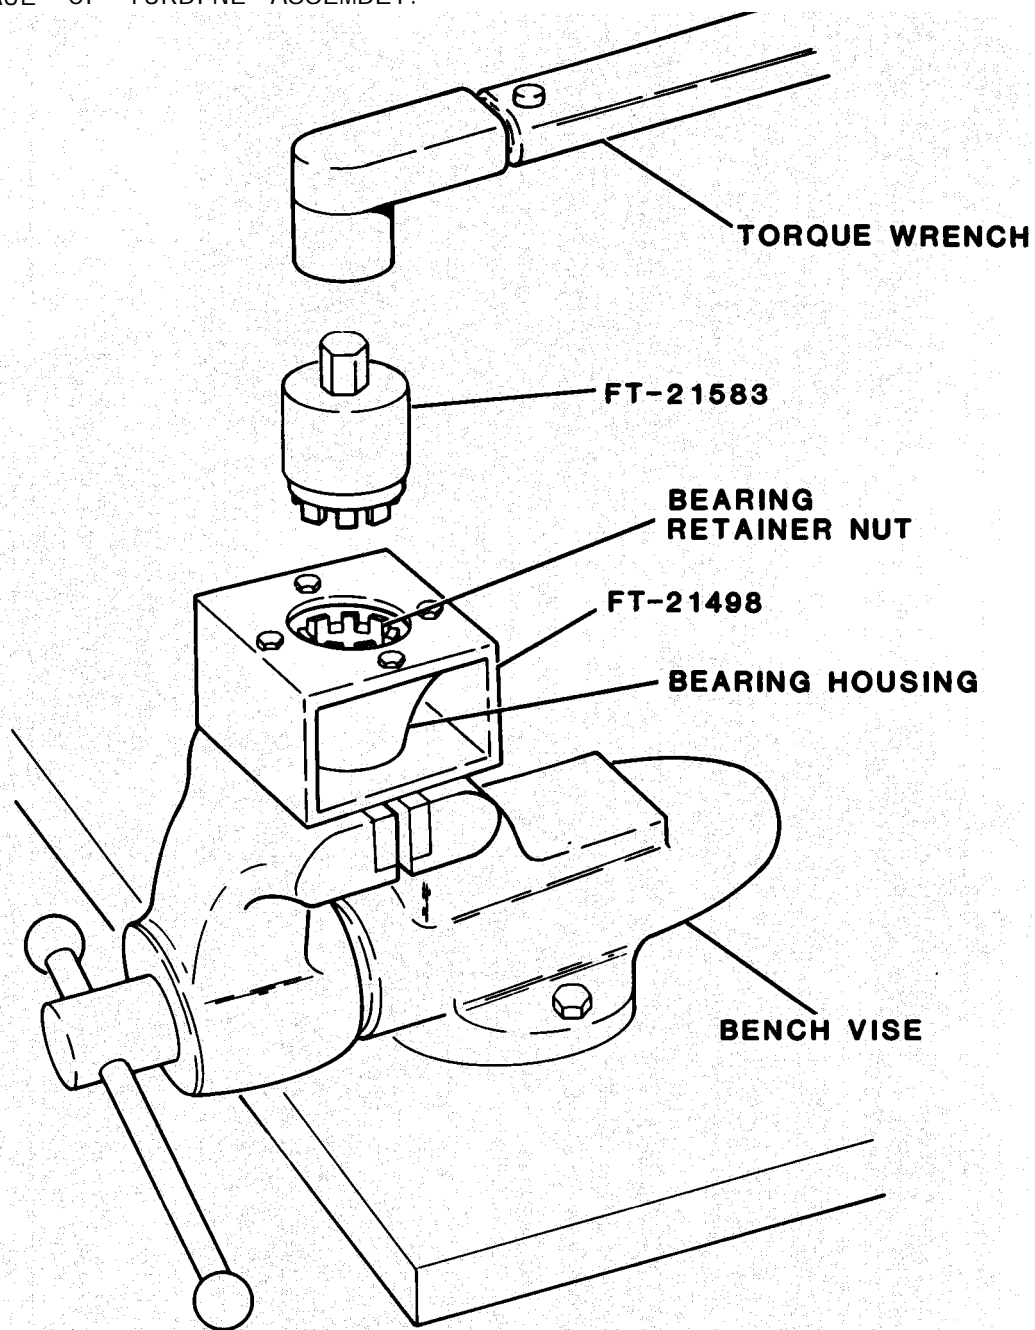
Removing/Installing Bearing Retainer Nut Using Fabricated Tools FT-21498 and FT-21583
